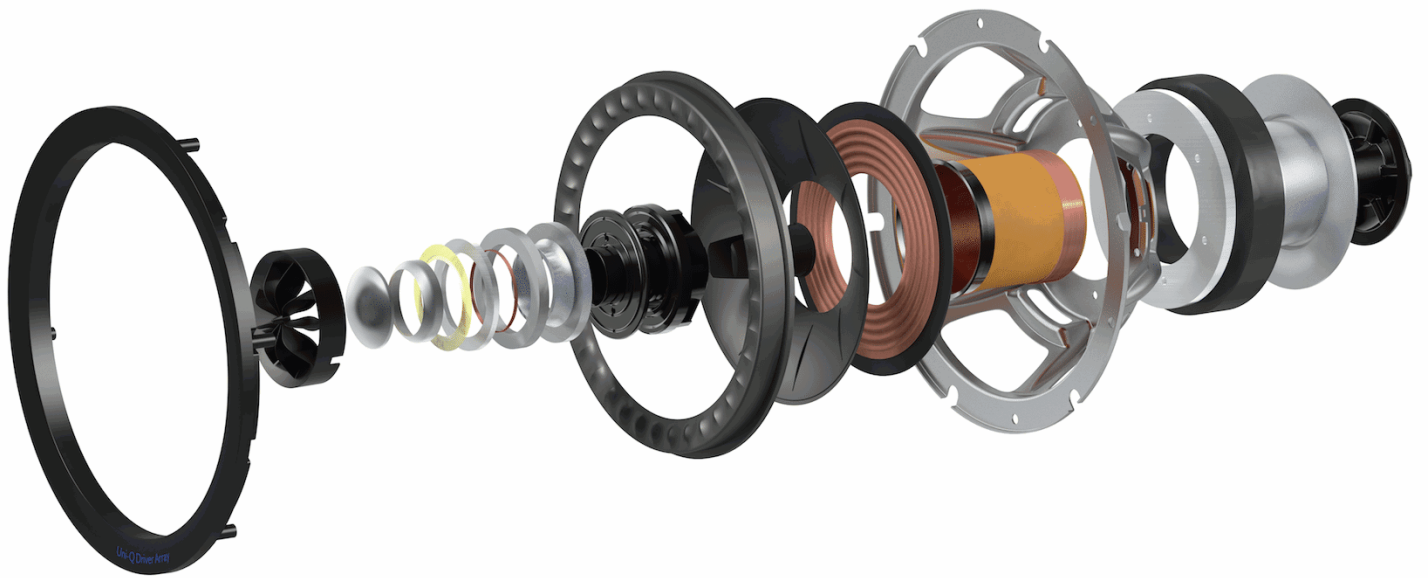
EXPLODED CAD VIEW OF THE KEF Q350 DRIVER ARRAY
